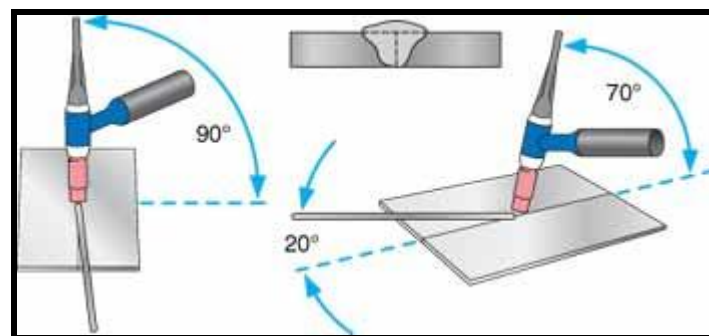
Schematic representation of butt-welding technique in manual GTAW process.
